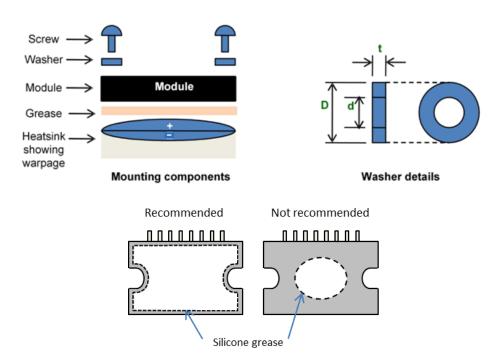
Module Mounting Details: Components; Washer Drawing; Need for Even Spreading of Thermal Grease
